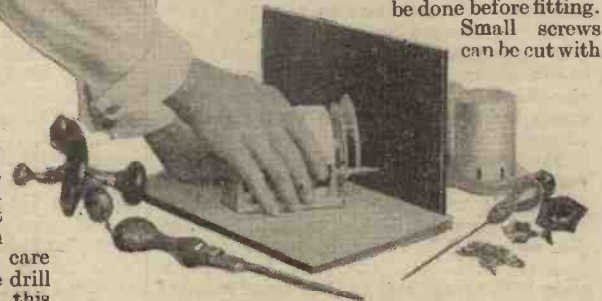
Scribing the position of the condenser spindle with the spindle itself.
